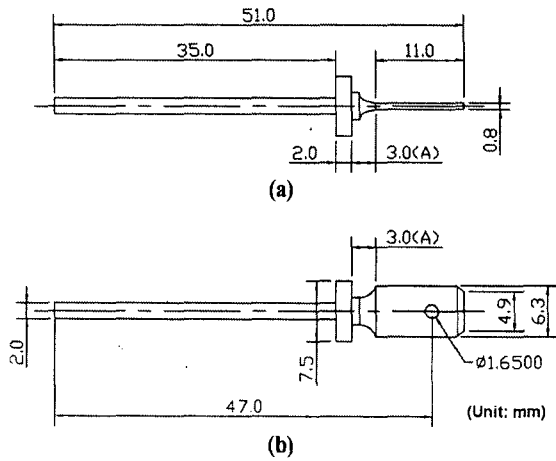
Drawing of a terminal pin: (a) side view and (b) top view
